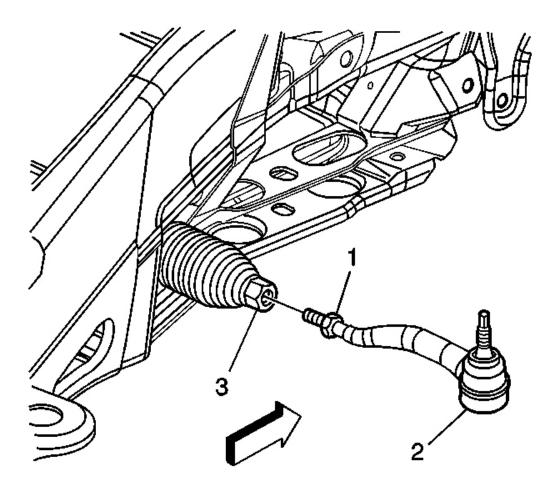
Removing/Installing Outer Tie Rod Courtesy of GENERAL MOTORS CORP.
